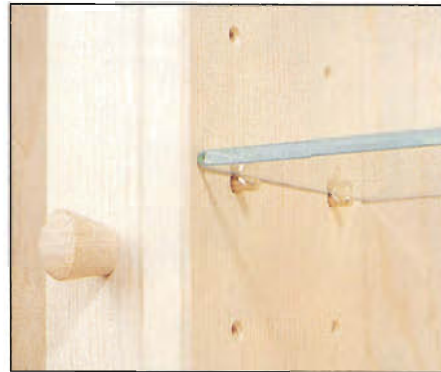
Photo W: This view shows the attached knob, chamfered support holes, brass-rod shelf supports, and fitted plate-glass shelf.
